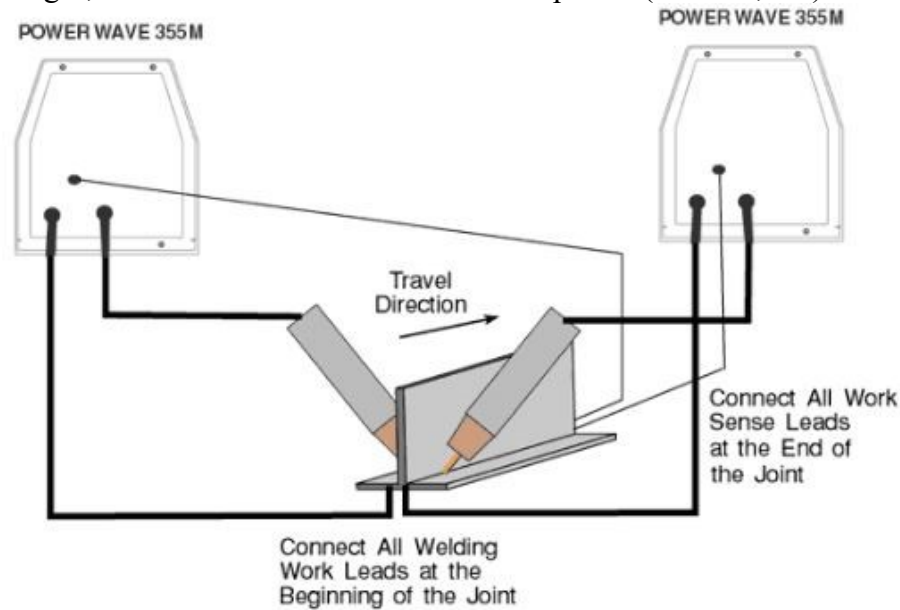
optimized welding circuit. (Lincoln electric n.d)
